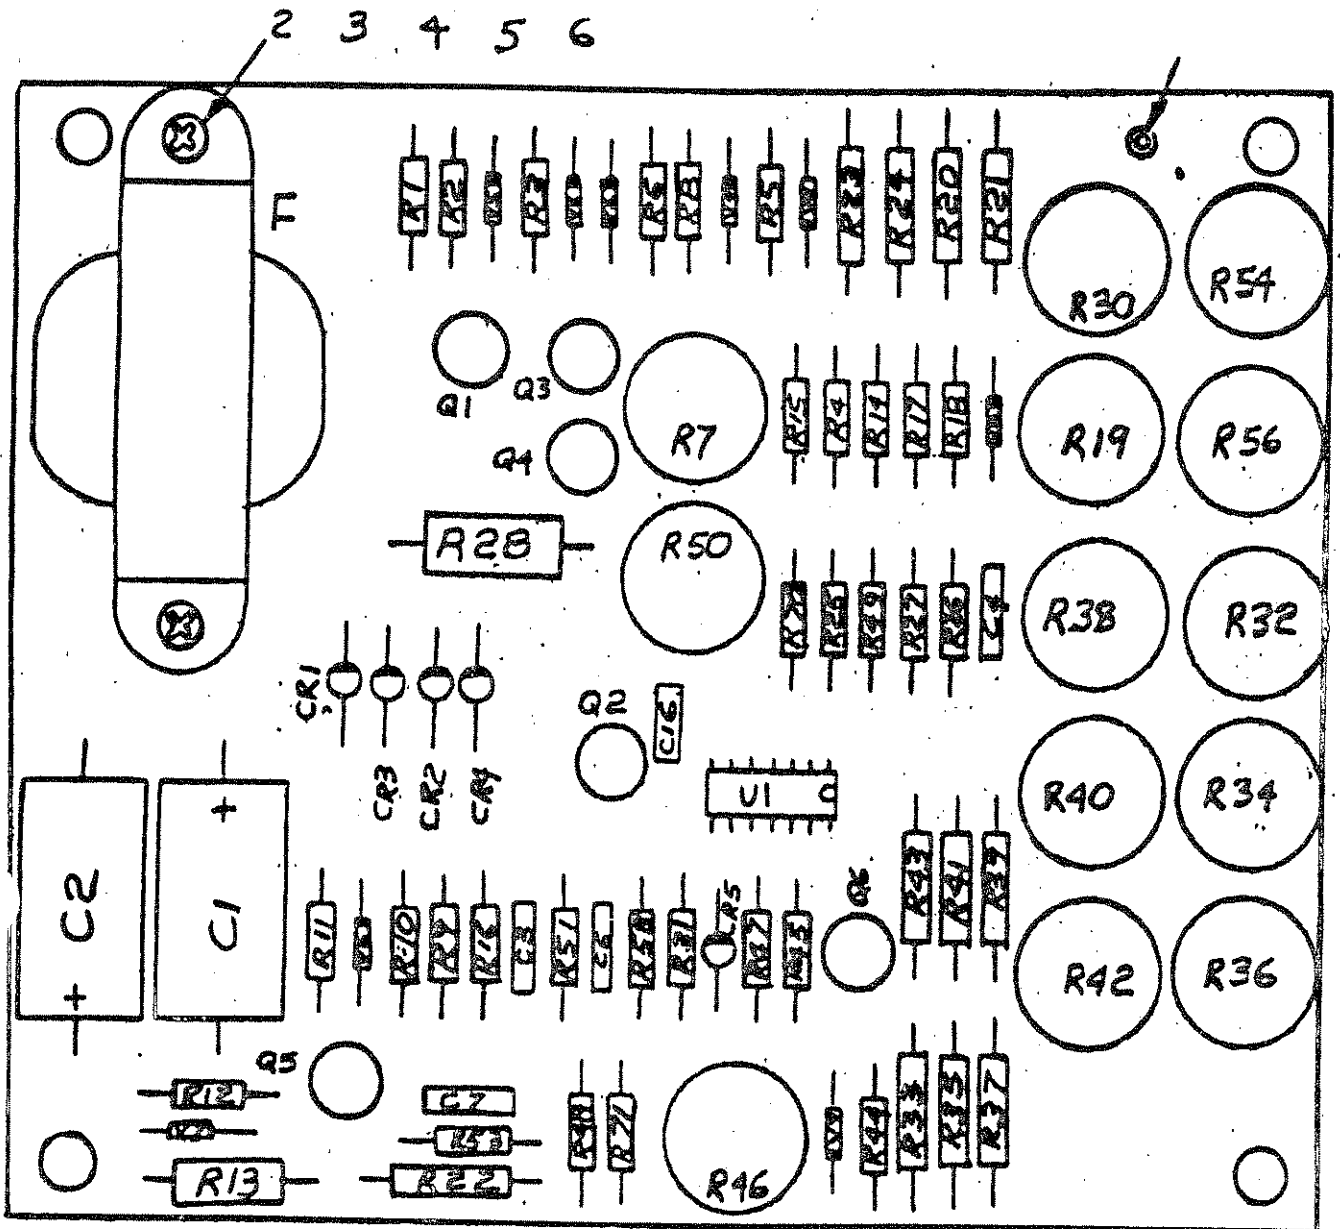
MAIN PCB COMPONENT LAYOUT.
